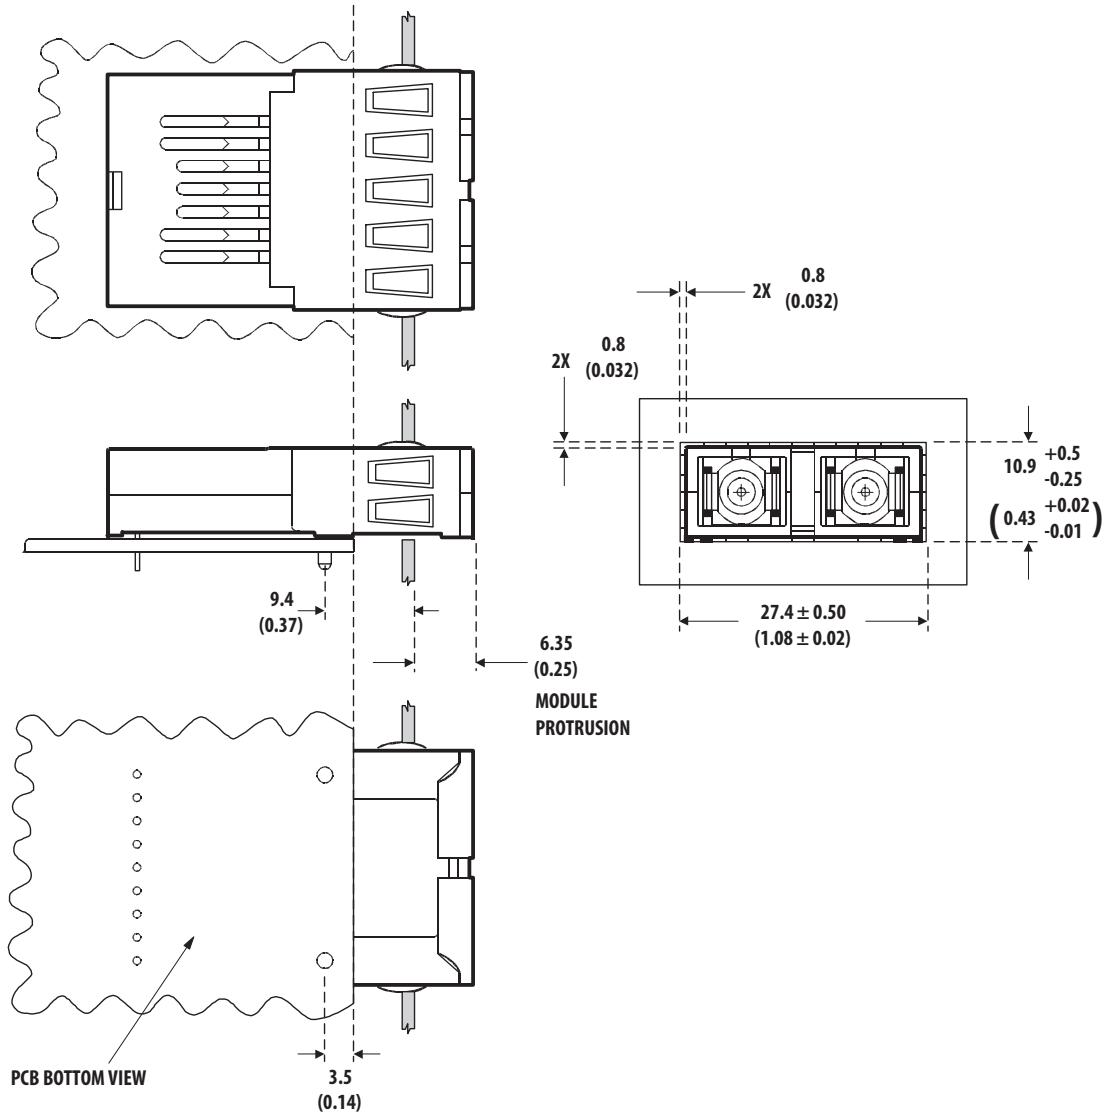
Suggested Module Positioning and Panel Cut-out for HFBR-5208EMZ
